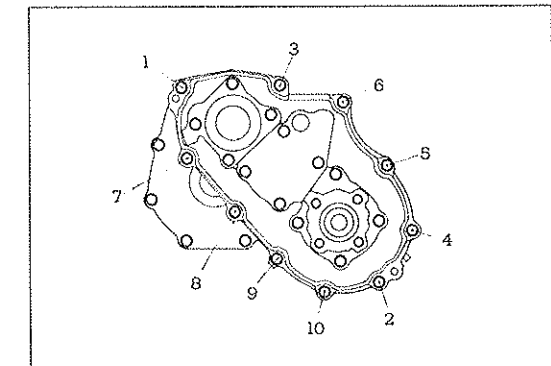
Transfer Case Attaching Bolt Tightening Sequence
